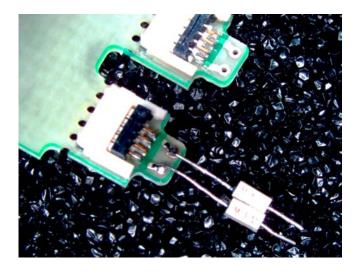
Solder Fillets Surrounding the Resistor Lead Wires
